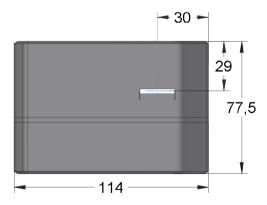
G2 camera head with internal filter wheel side view dimensions
